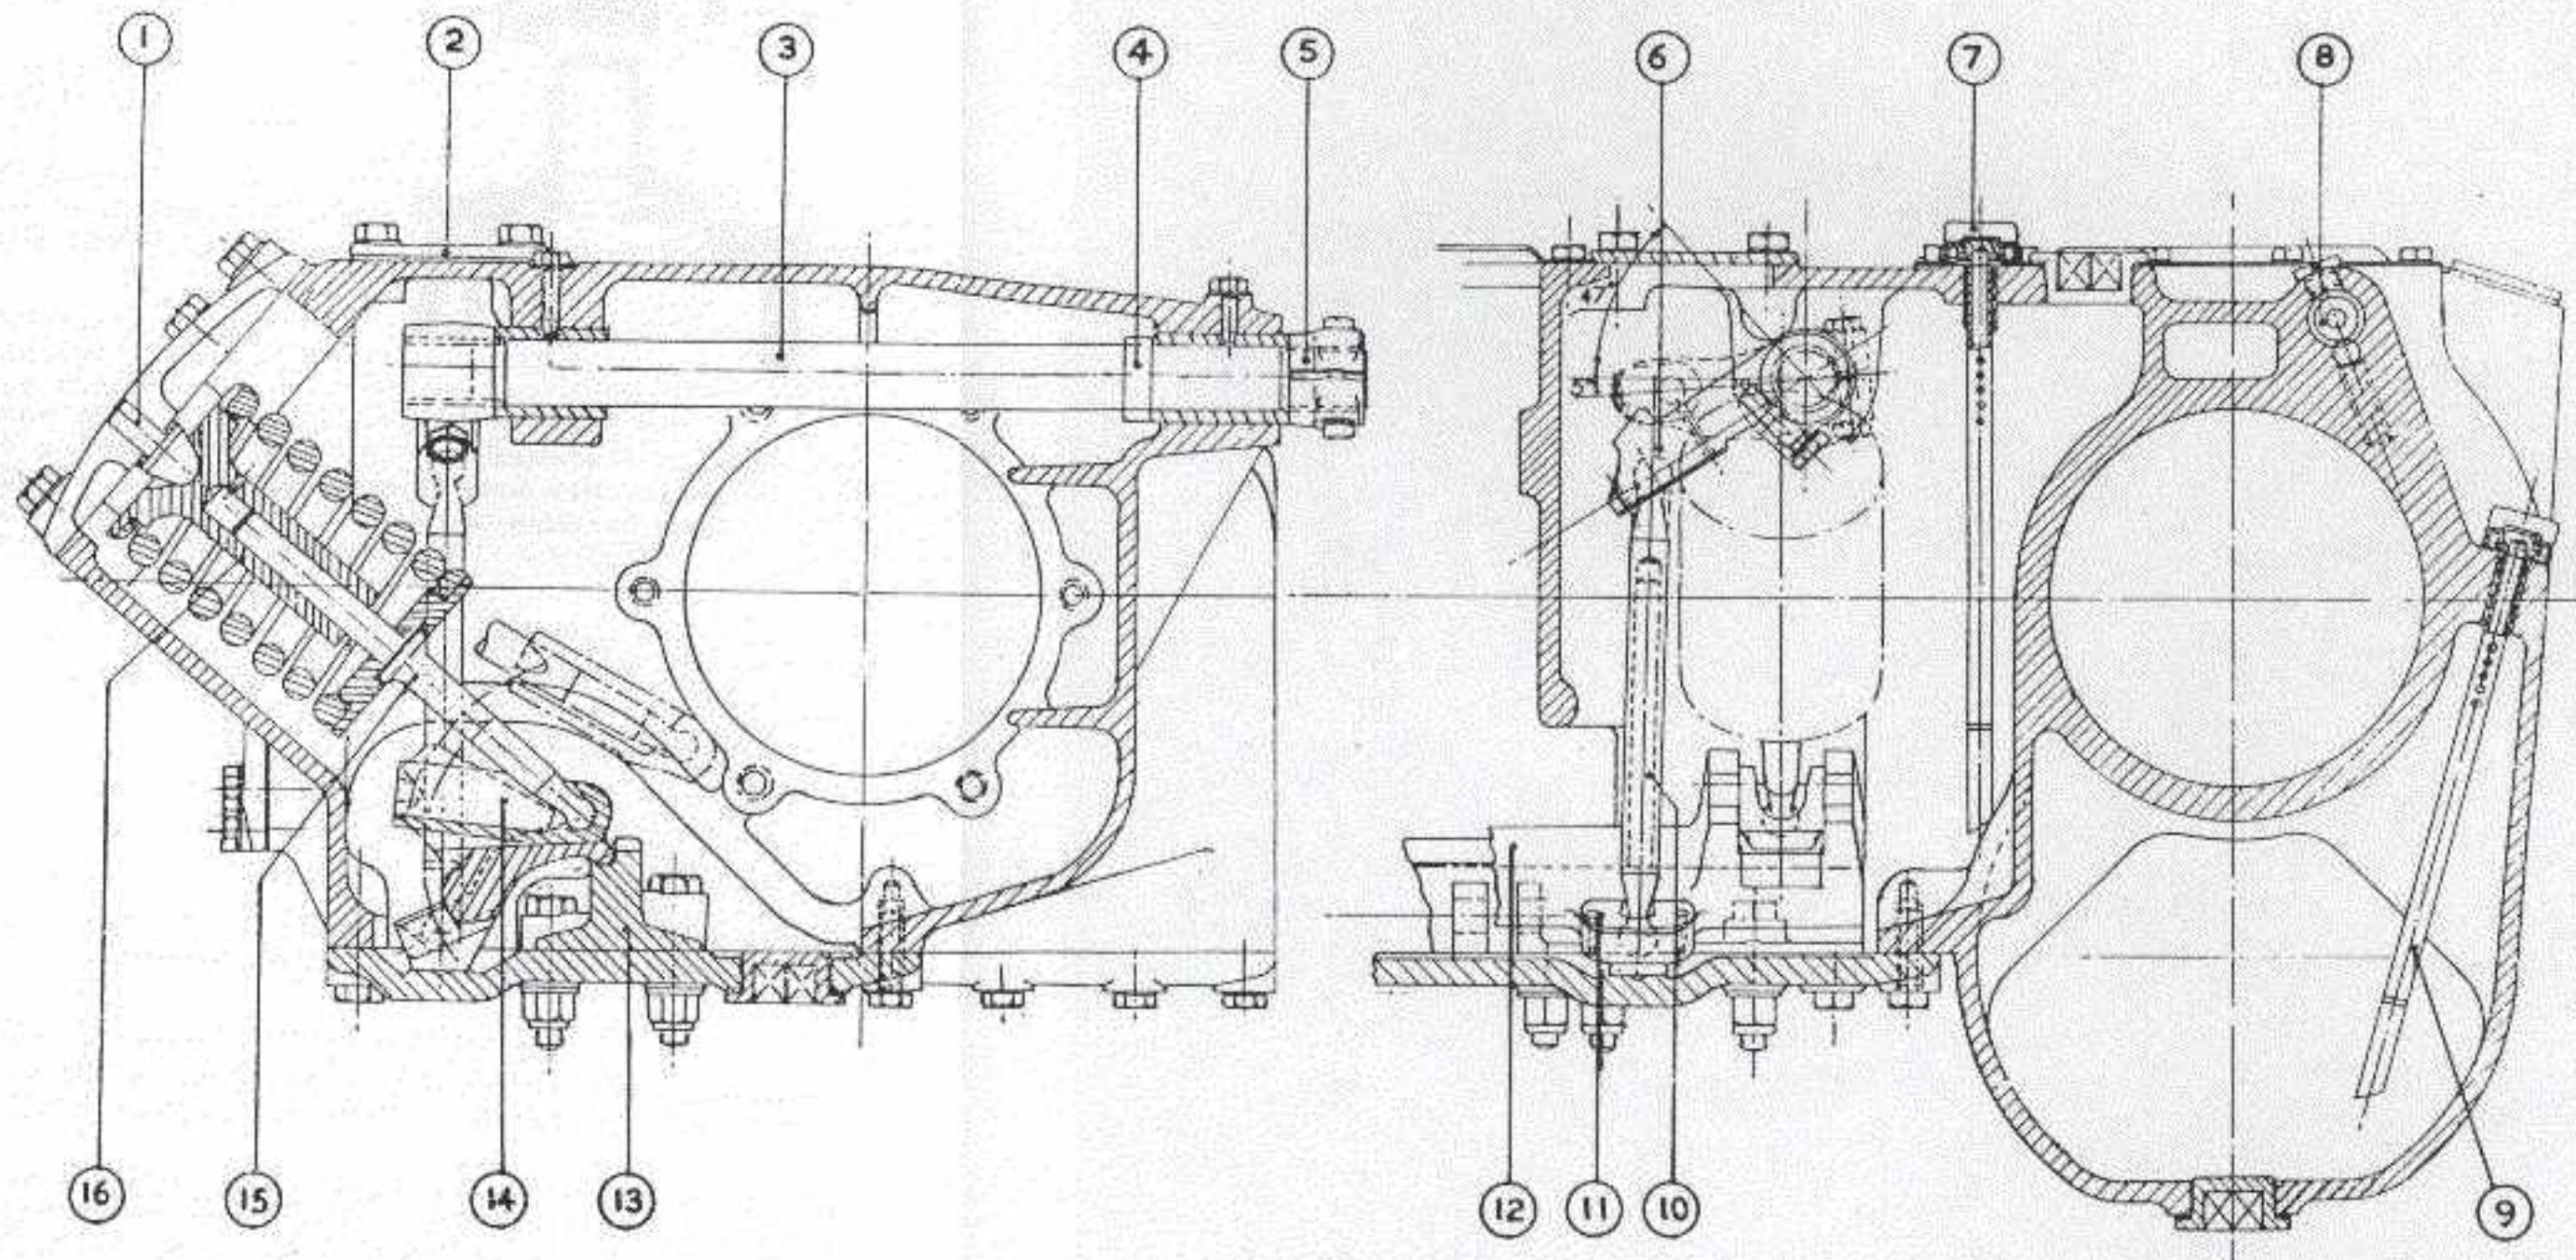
GEARBOX - METHOD OF SUPPORTING 5TH GEAR PULL-ROD DURING REMOVAL OF OPERATING GEAR
